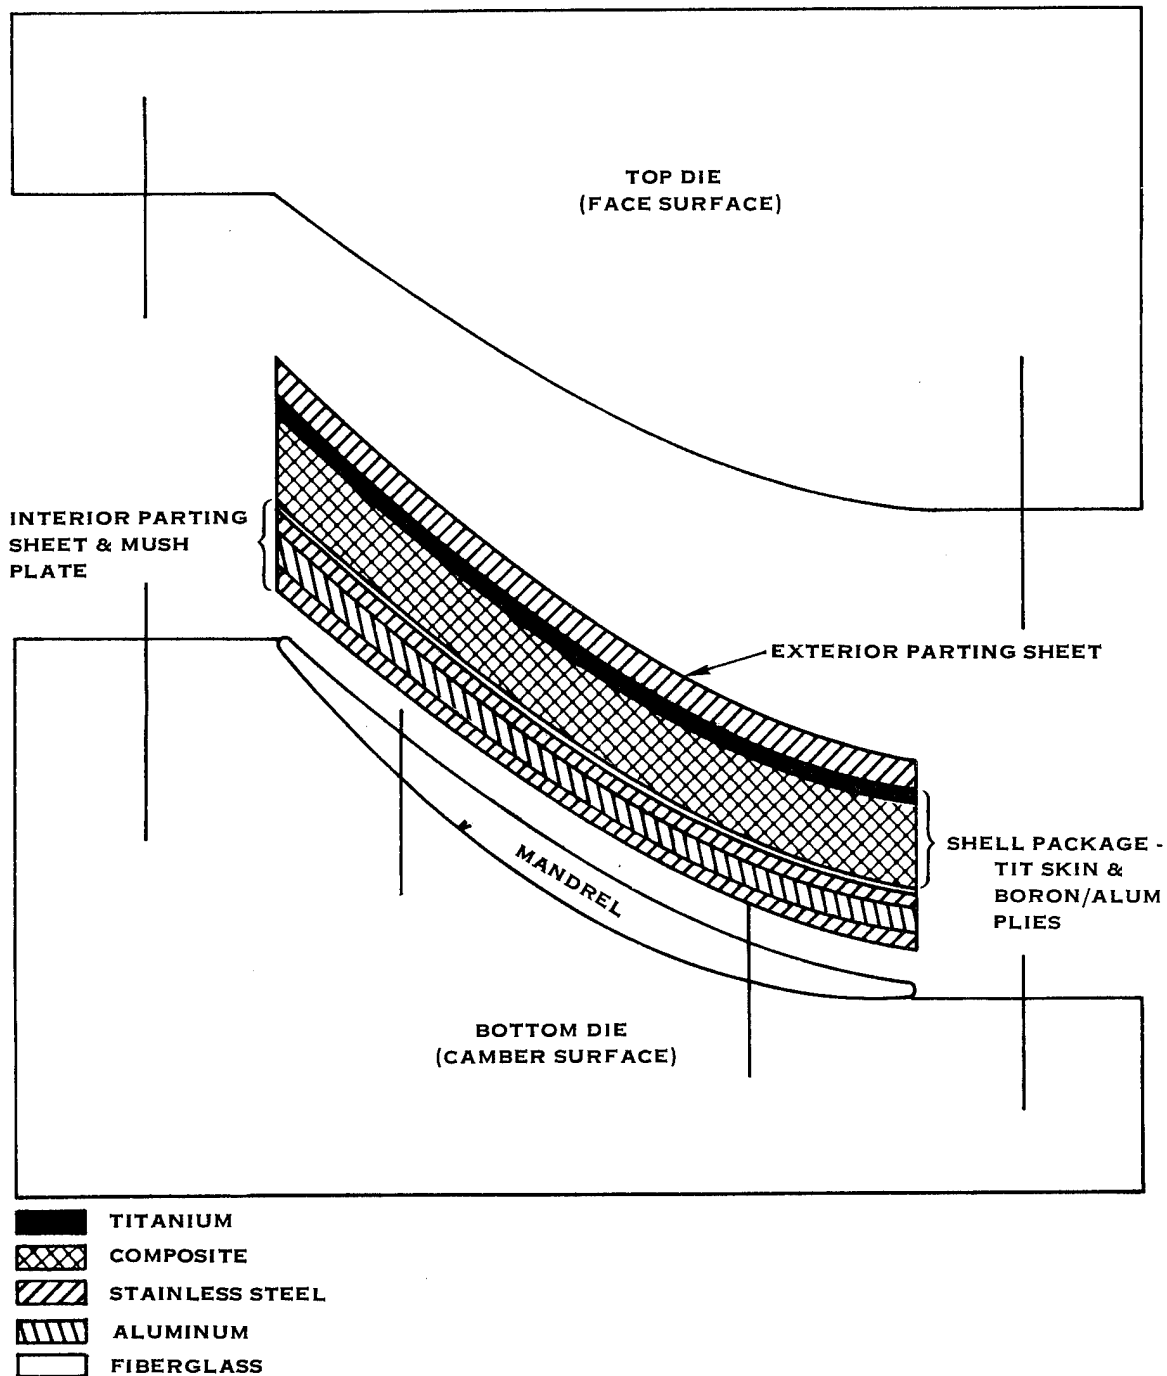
SCHEMATIC OF DIE & MANDREL ASSEMBLY USED TO
